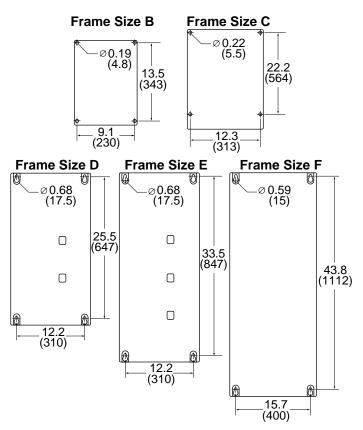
Mounting Dimensions of SED2 (IP54, NEMA Type 12). Dimensions in Inches (Millimeters).
